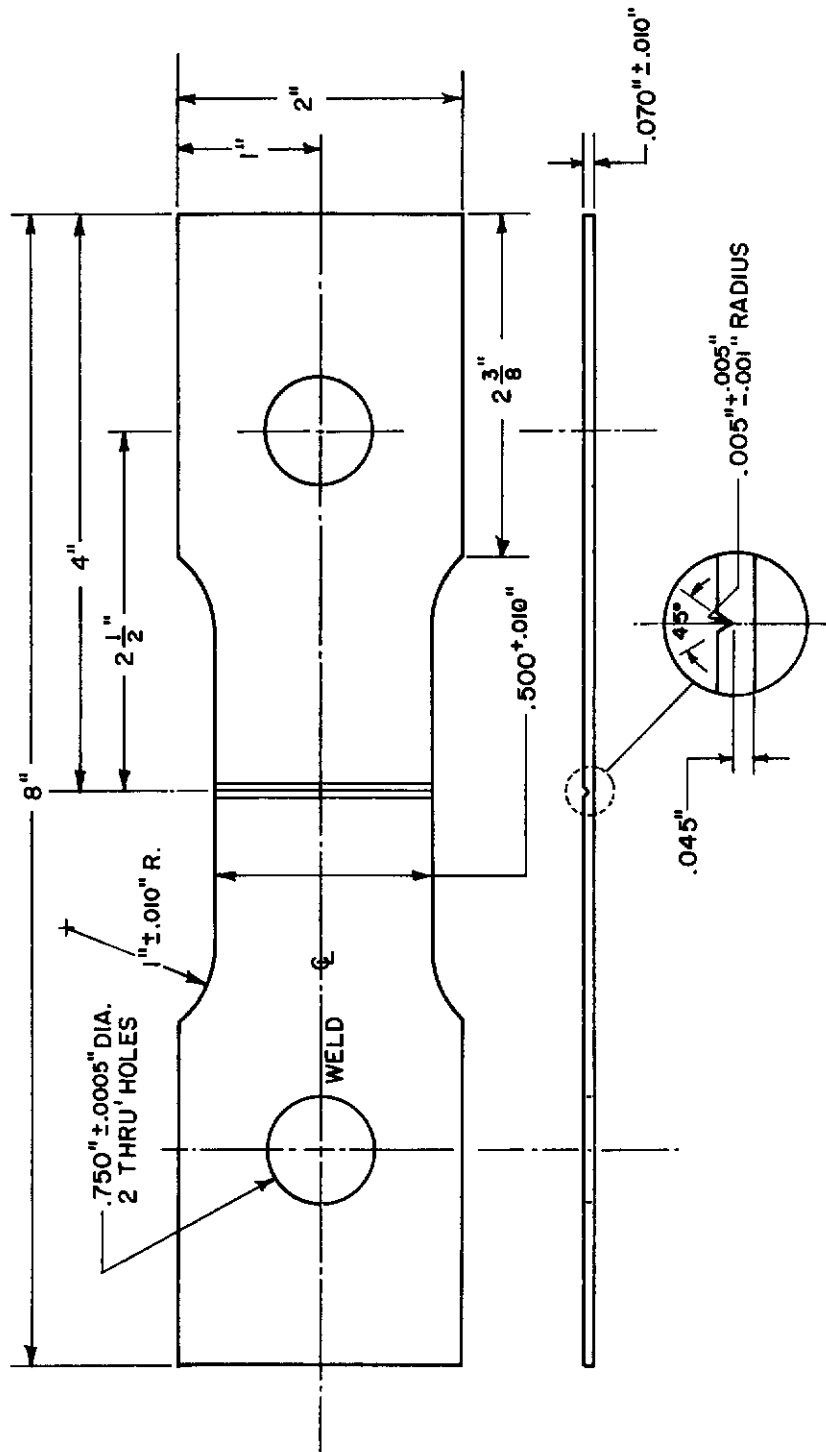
LONGITUDINAL WELD, TRANSVERSE NOTCH, TENSILE SPECIMEN
